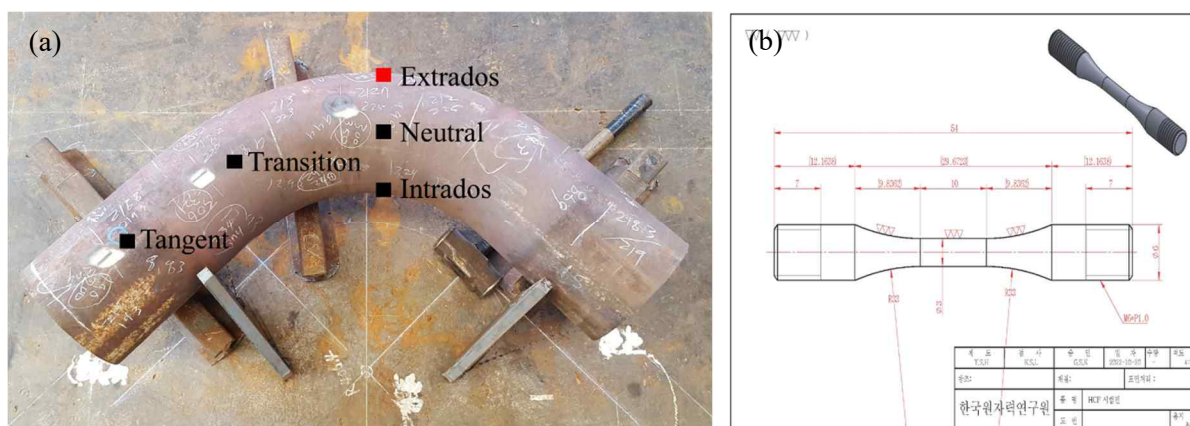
(a) P91 steel pipe fabricated by induction bending, (b) drawing of the specimen test.
